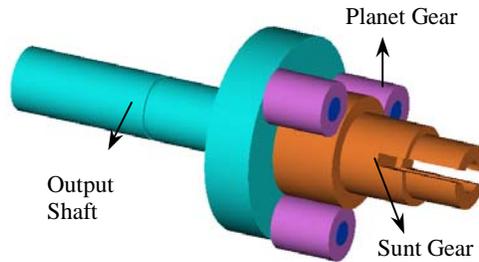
Planet Gear Carrier and Sun gear Assembly.
